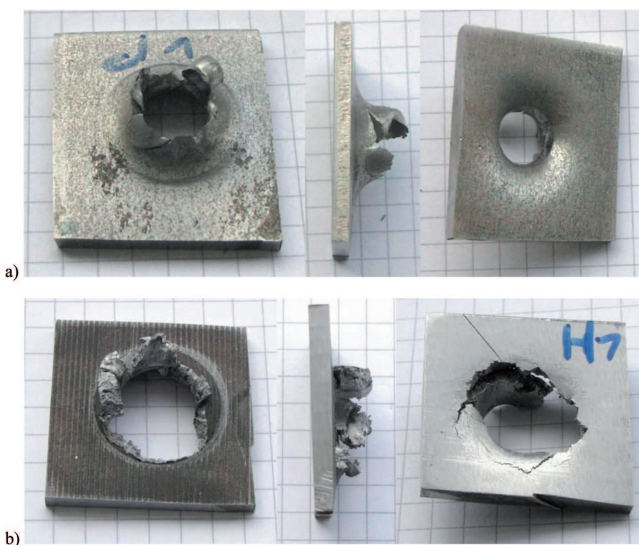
View of the specimen after the perforation test: a) VP159 steel VP159; b) LH556 cast alloy
